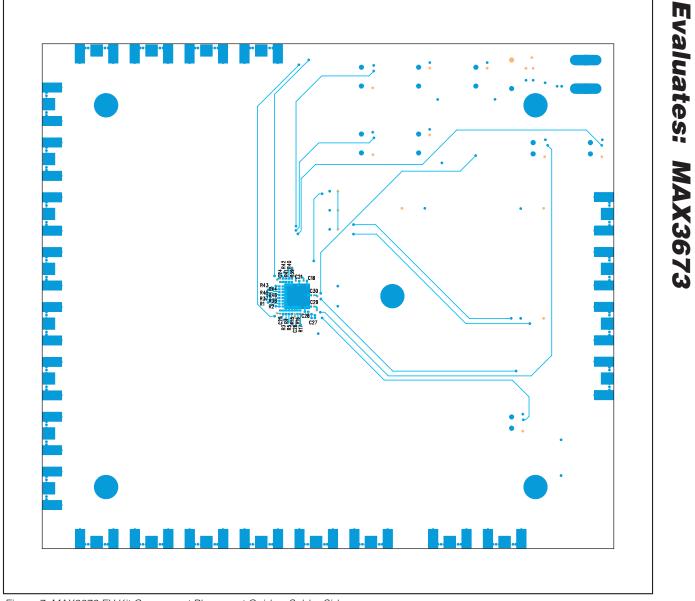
MAX3673 EV Kit Component Placement Guide—Solder Side
